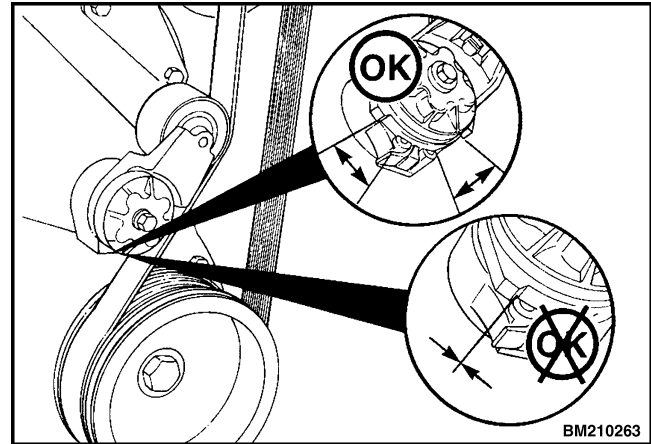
Cooling Fan Belt Tensioner Arm Stops with Drive Belt
